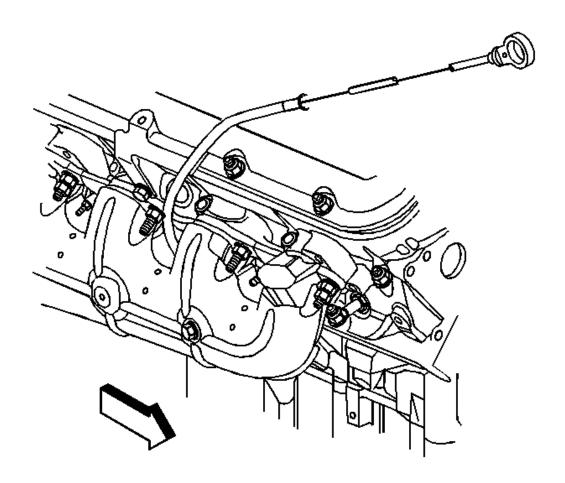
View Of Oil Level Indicator & Tube Courtesy of GENERAL MOTORS CORP.
